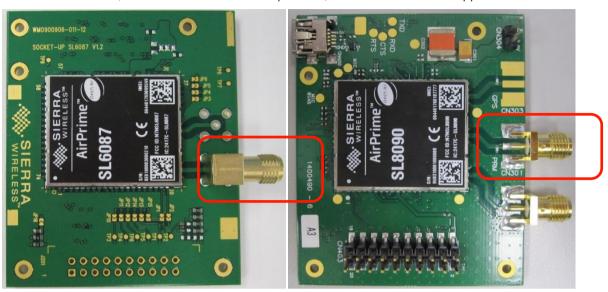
SMA Connector on the Socket-Up Board for AirPrime SL6087 and SL8090
